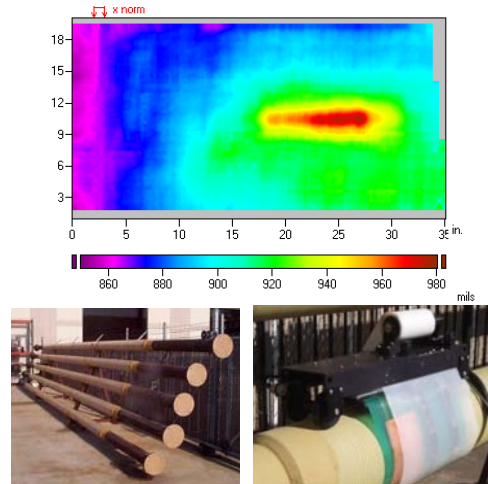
MWM-Array image (top) of a manufactured external corrosion defect through 1 in. coating on a riser (bottom left). Scanner is shown bottom right.
